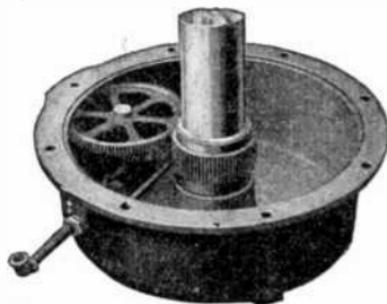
,244.—Westinghouse vertical water wheel alternator oil pan and pump. A positive type of pump geared to the alternator shaft provides continuous lubrication for the two guide bearings and the thrust bearing.
